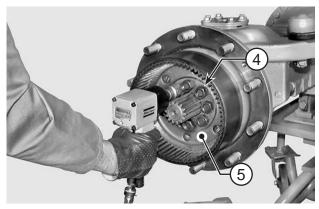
Loosen and remove the nuts (4) that lock the gear safety flange (5).
